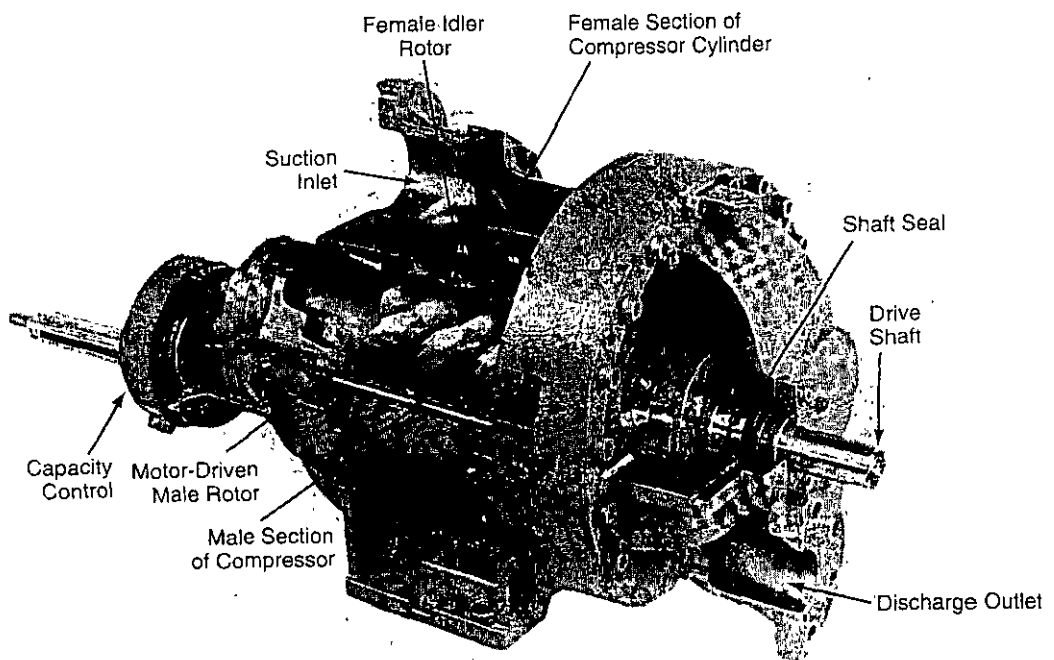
Screw compressor which uses a matched set of helical rotors. (Dunham-Bush, Inc)
